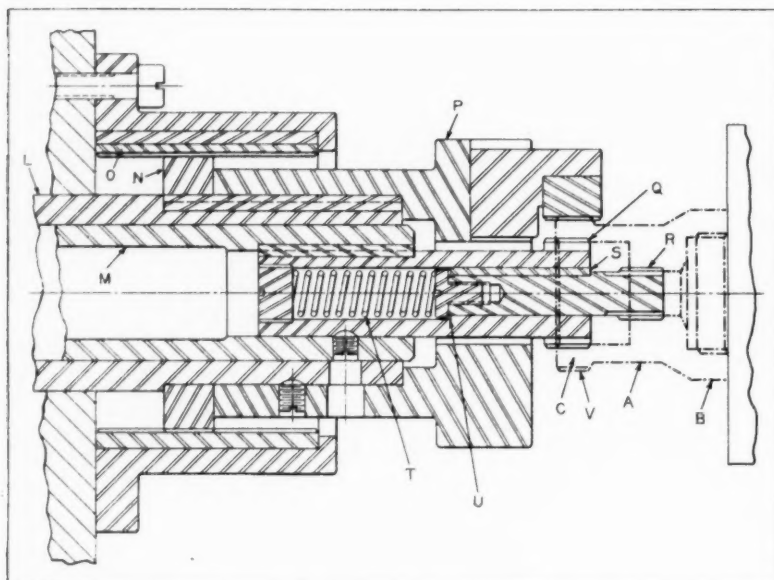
Tapping and Threading Tool which Produces Two Internal Threads and One External Thread Simultaneously
